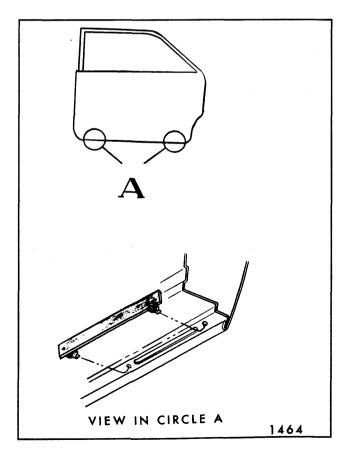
Door Bottom Drain Hole Sealing Strips
